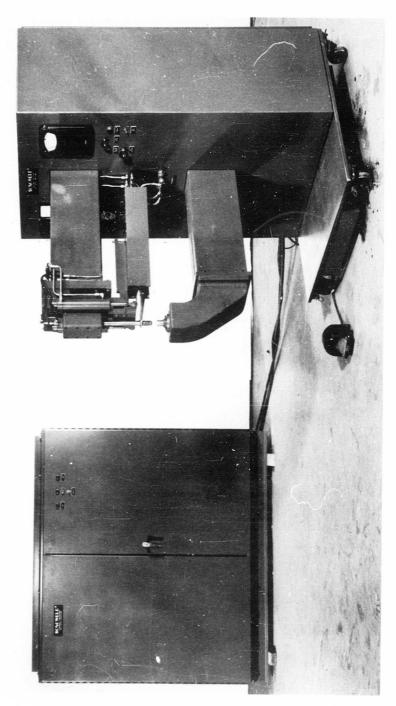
A TYPICAL 4-KILOWATT ULTRASONIC WELDING MACHINE
